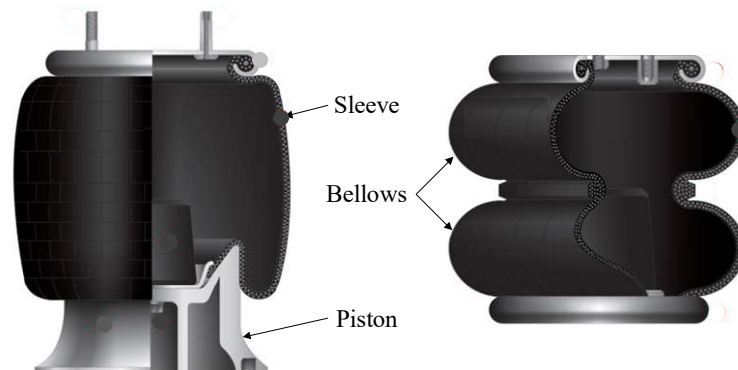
Reversible sleeve and convoluted air spring [33].
